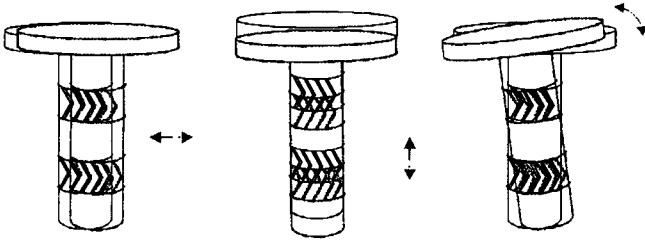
5-degree of freedom motion of the spindle motor bearing.
